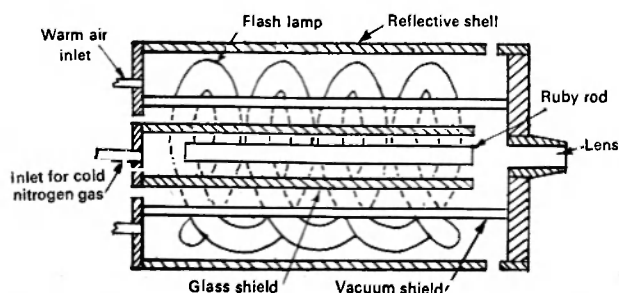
Typical laser head for welding cold nitrogen gas flows over ruby; warm air flows over flash lamp.
